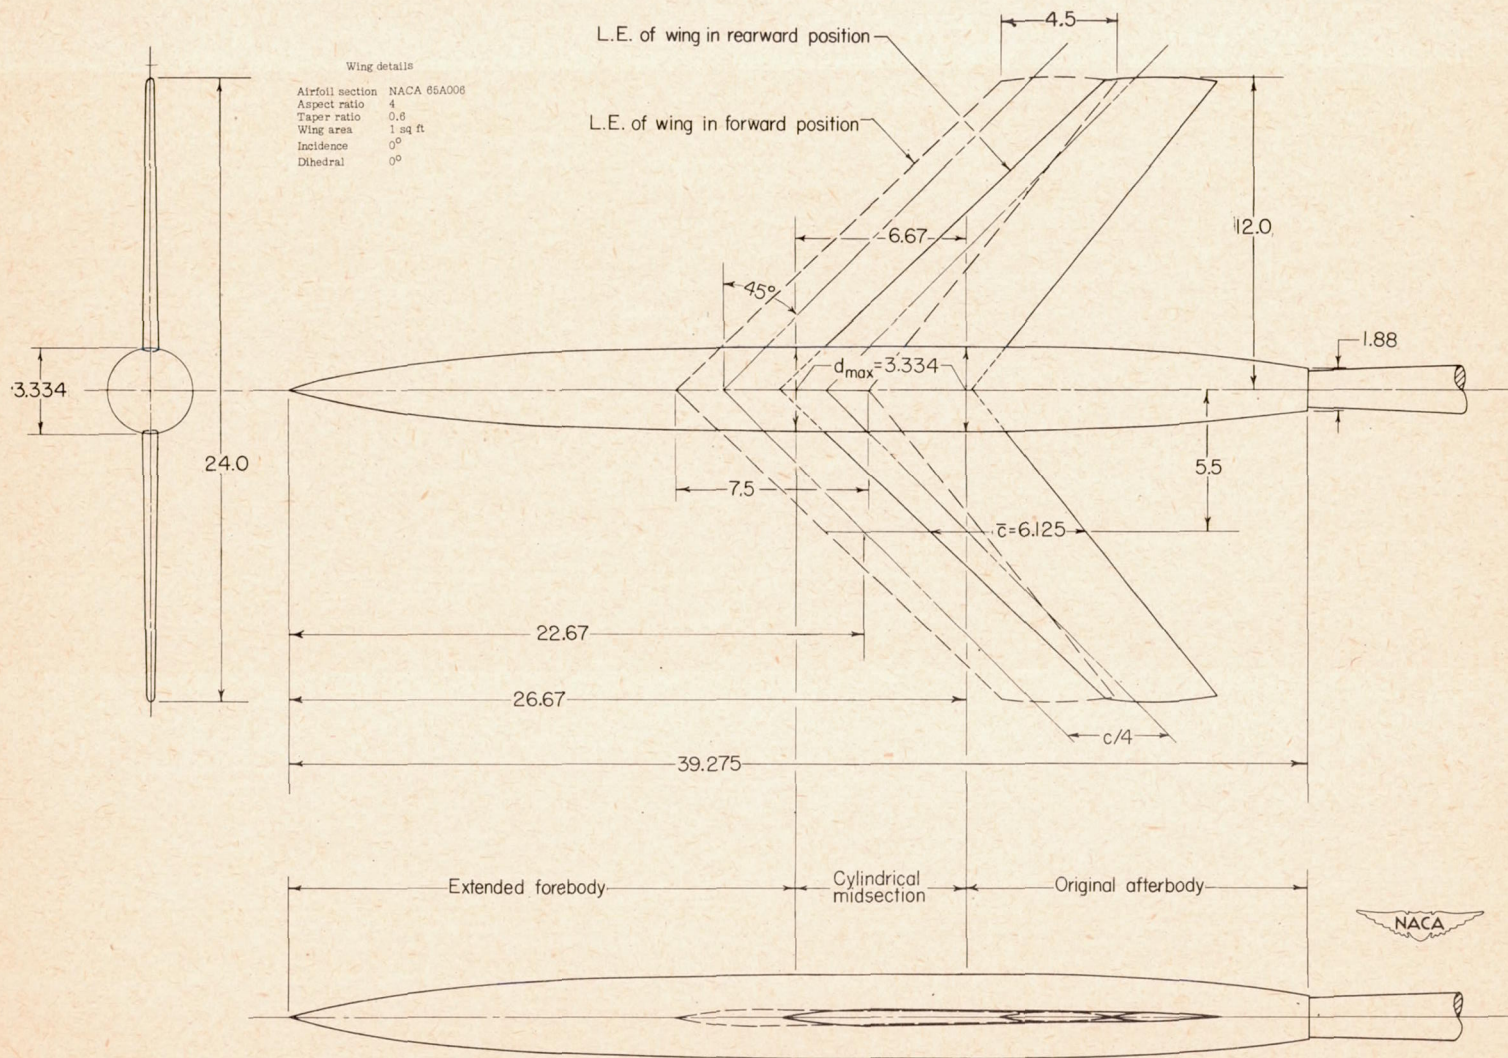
Dimensions of models used for investigation of wing location on body. All linear dimensions are in inches.
